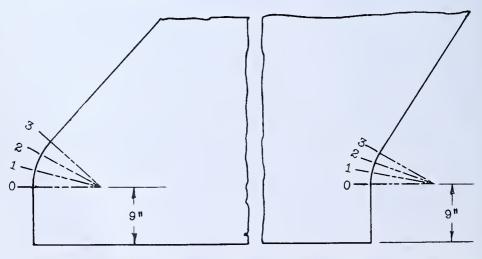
Enlarged View of Base of Uptake Layout in Fig. 336
